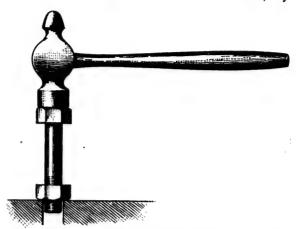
SCREWING UP A NUT WITH A HAMMER.
